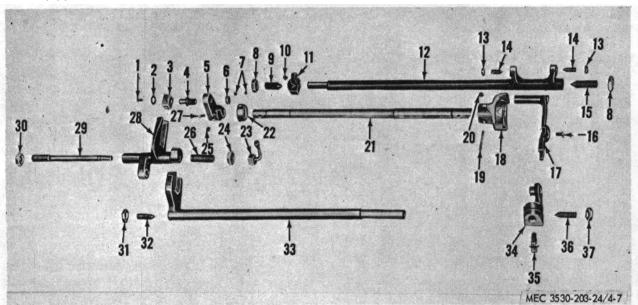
Heavy-duty sewing machine bed, disassembled.
